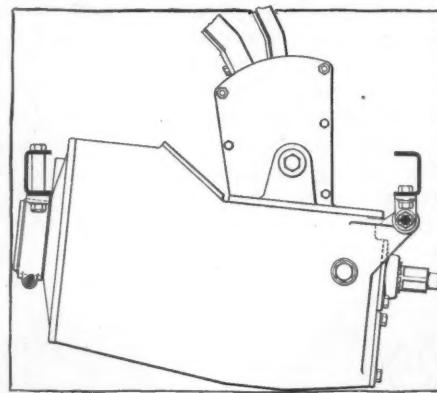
EDWARDS CENTER CONTROL MOUNTING
